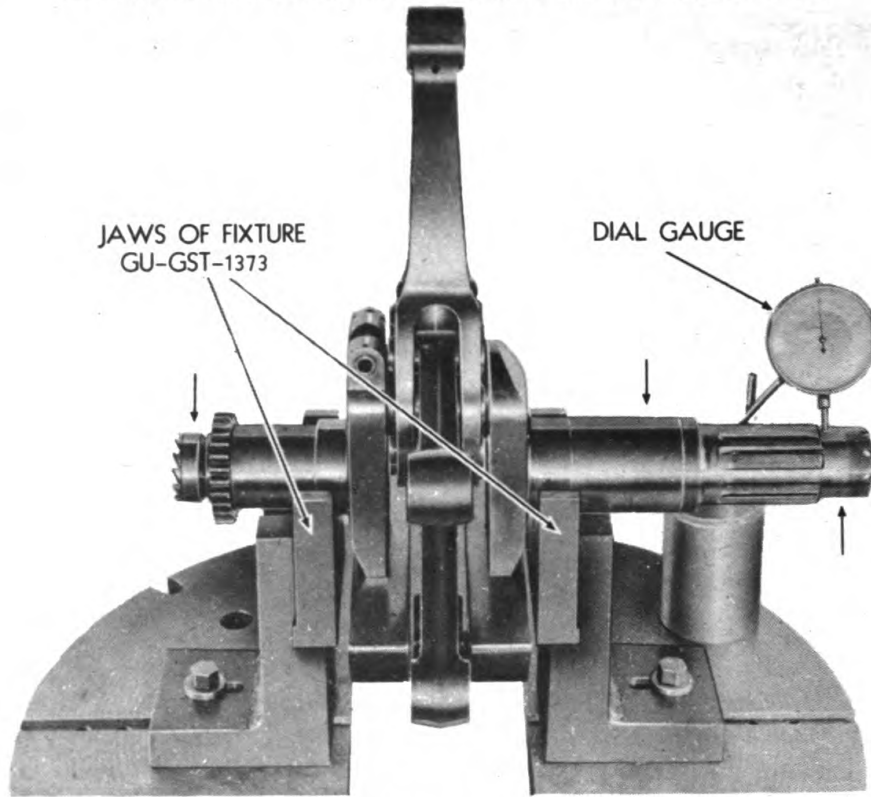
Checking crankshaft run-out. RA PD 6615
